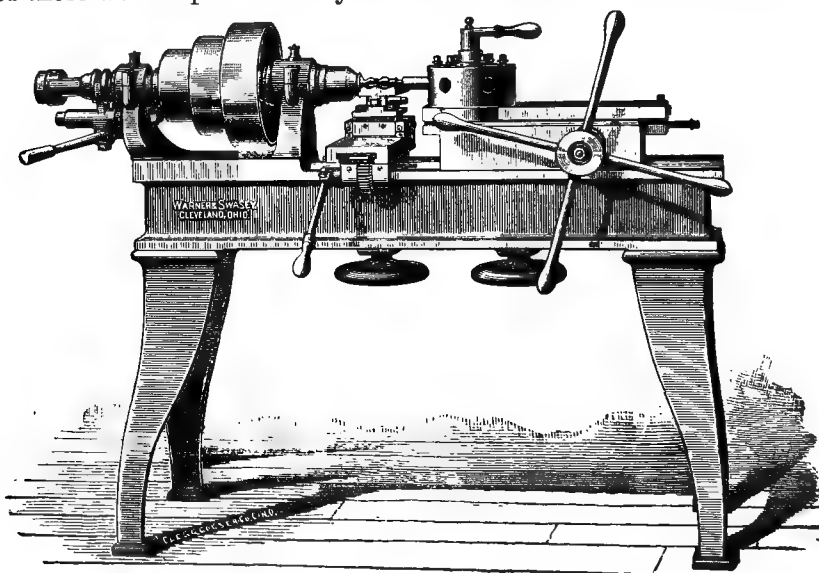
Turret lathe with forming tools; Warner & Swasey, United States.
